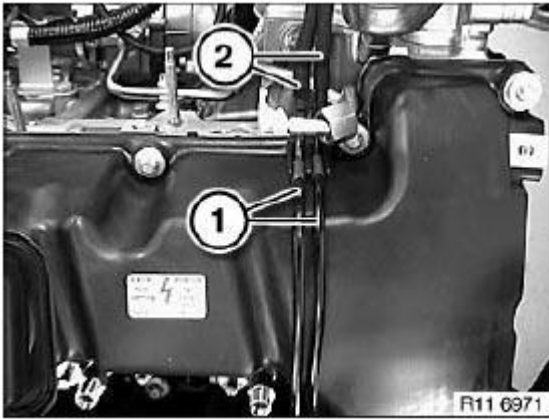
Identifying Vacuum Lines And Vacuum Lines
